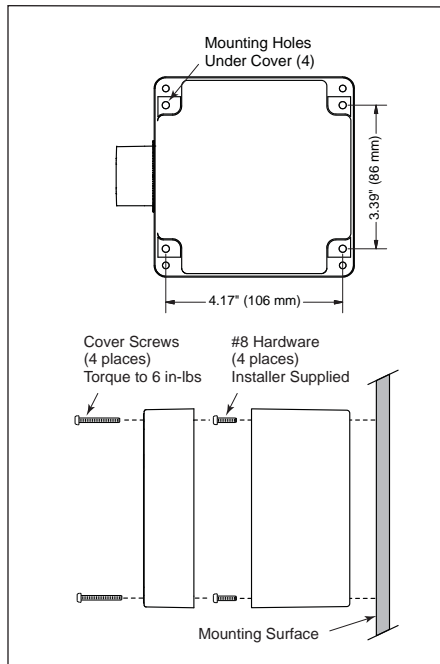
Wall Mounting Using Internal Mounting Holes
